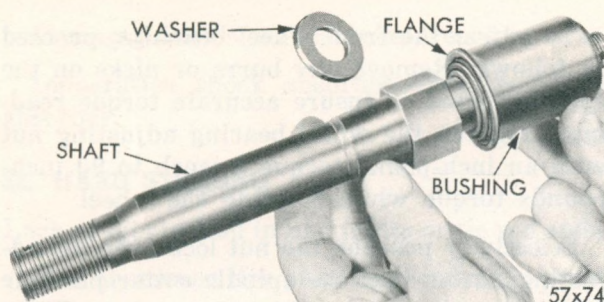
Removing or Installing Lower Control Arm Pivot Shaft Bushing
